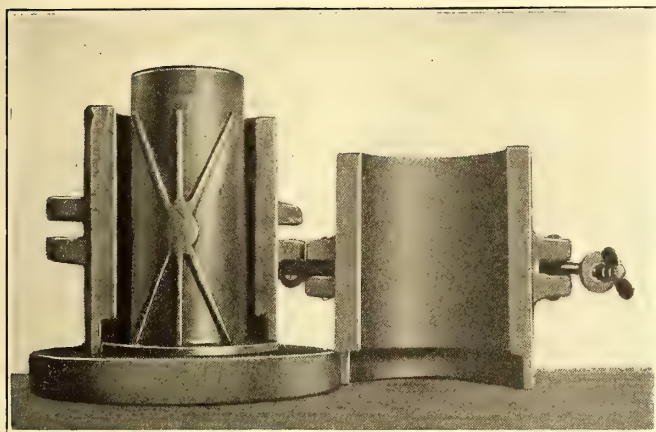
DEVICE FOR BABBITTING SPLIT BEARINGS
